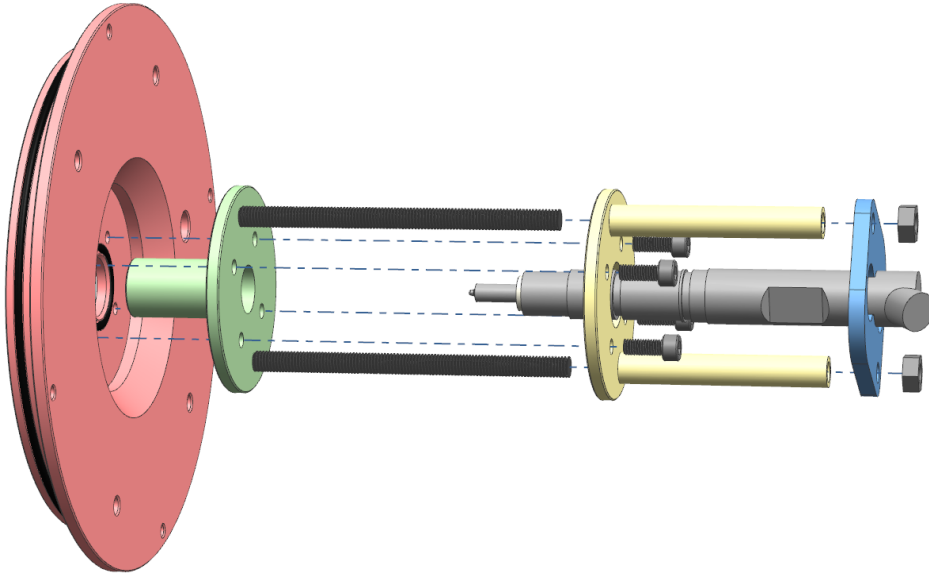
Exploded view of injector chamber base plate and injector clamp-down components
